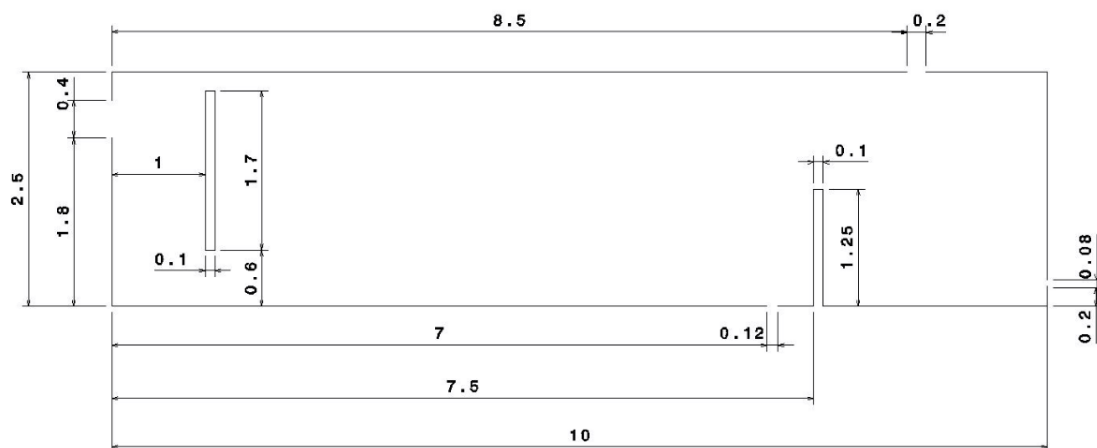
Engineering Drawing of the Separator Geometry in Meters
